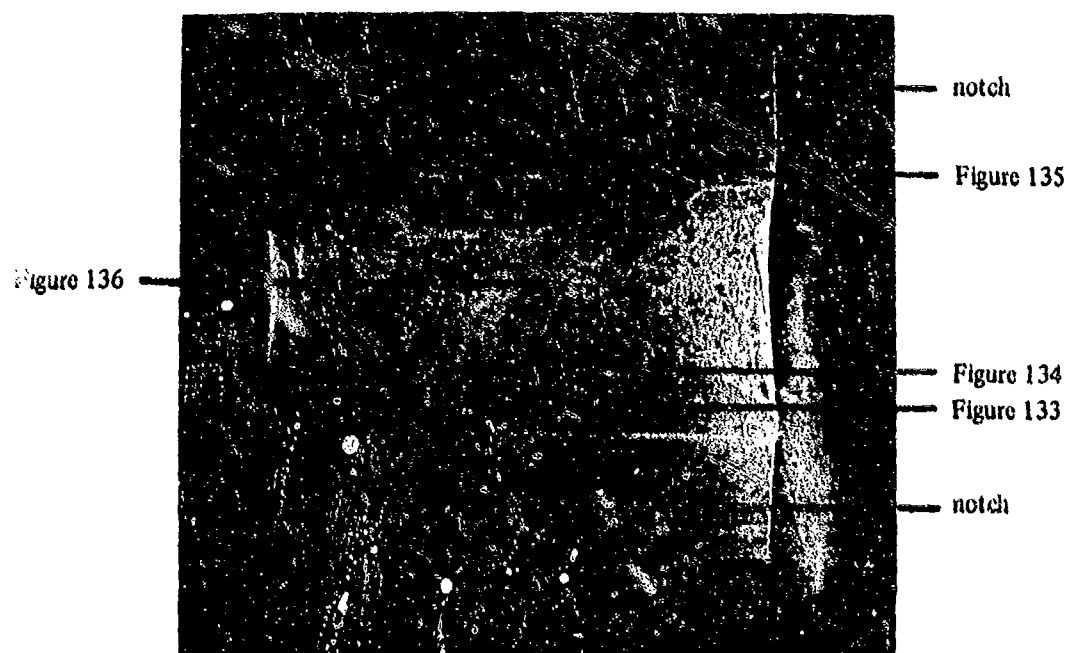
Fatigue fracture surface of temper-embrittled AX-110 weld specimen, 11x.
